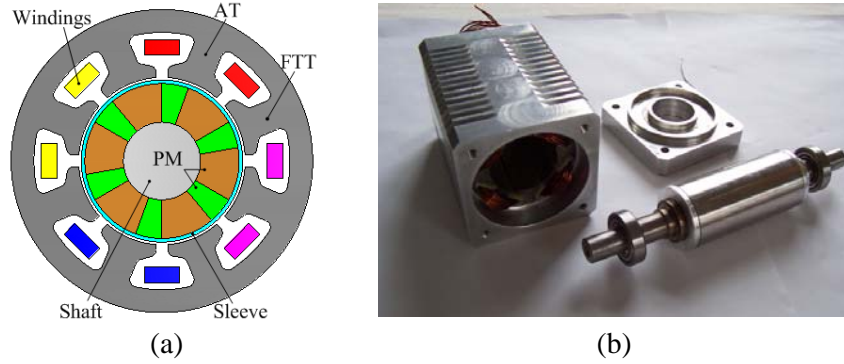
HPM machine. (a) Cross-sections. (b) Prototype machine.
